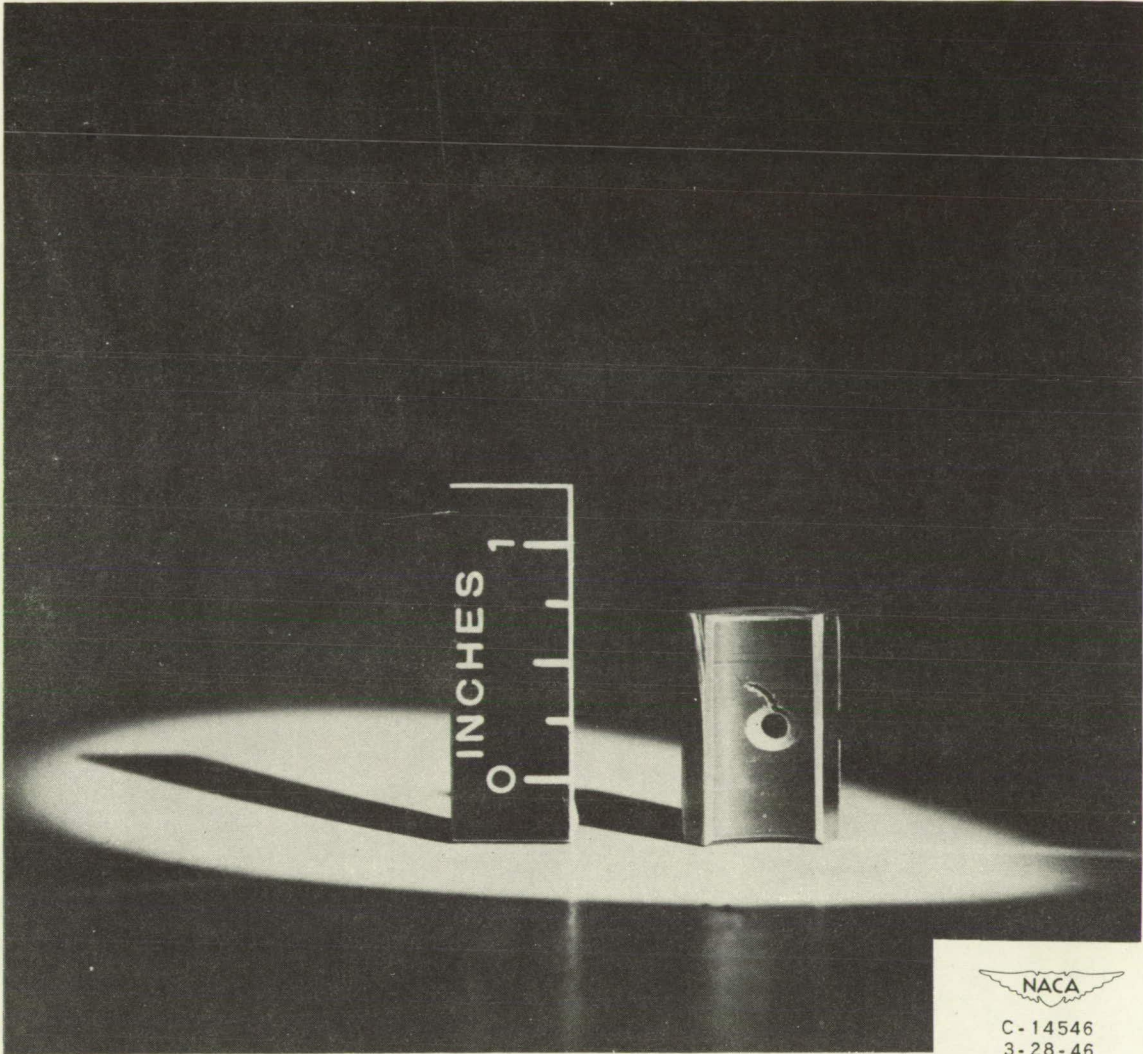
Severe erosion adjacent to oil hole of bearing.
